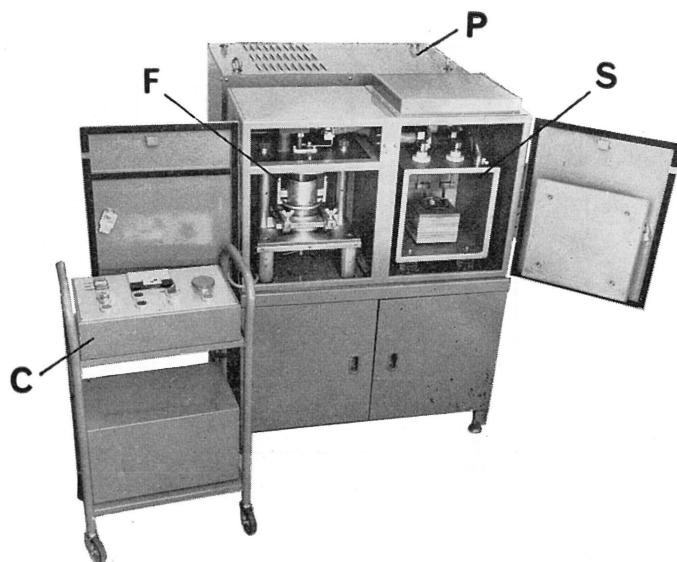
Press forming and spraying equipment of wire explosion, specially designed for prosthetic dentistry
